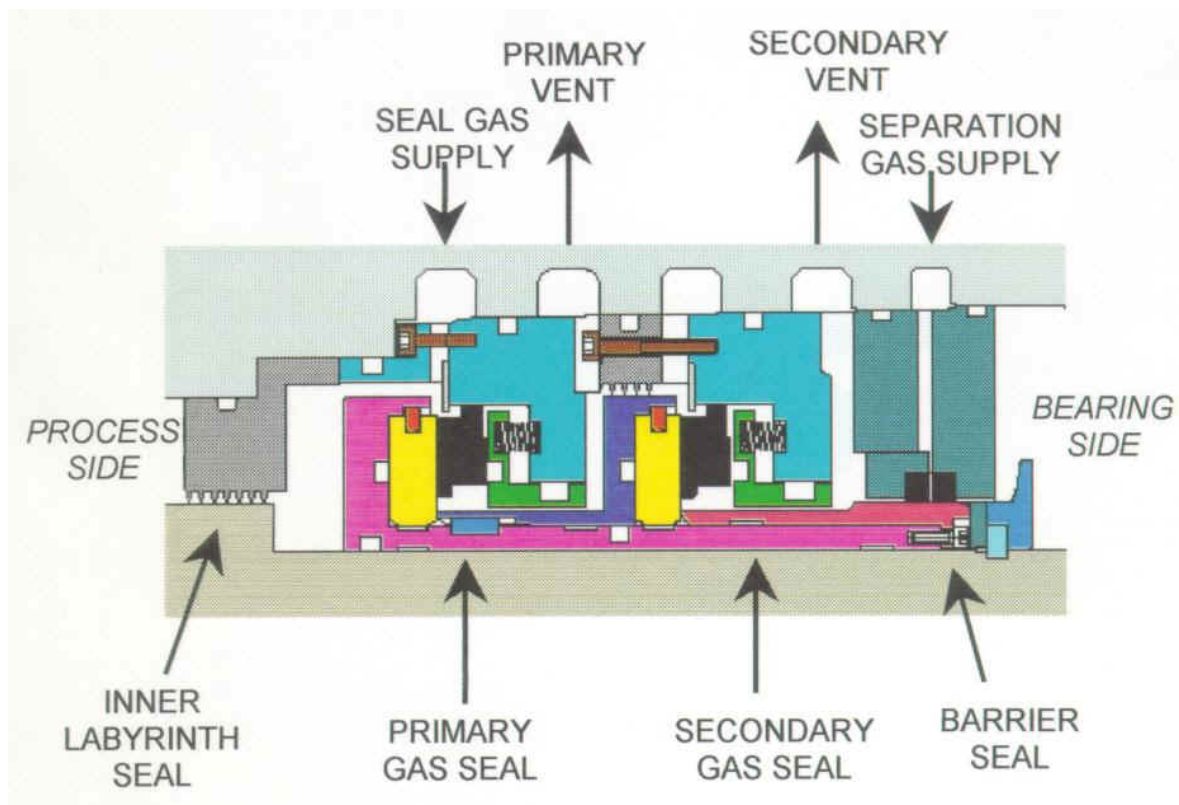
Typical Tandem Gas Seal / Barrier Seal Configuration
